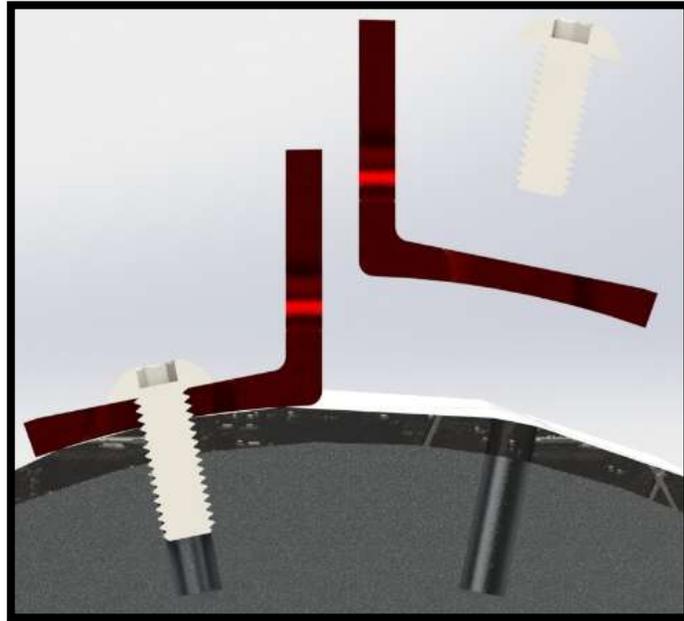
Dimensional Drawing of Fin Mounting Brackets
